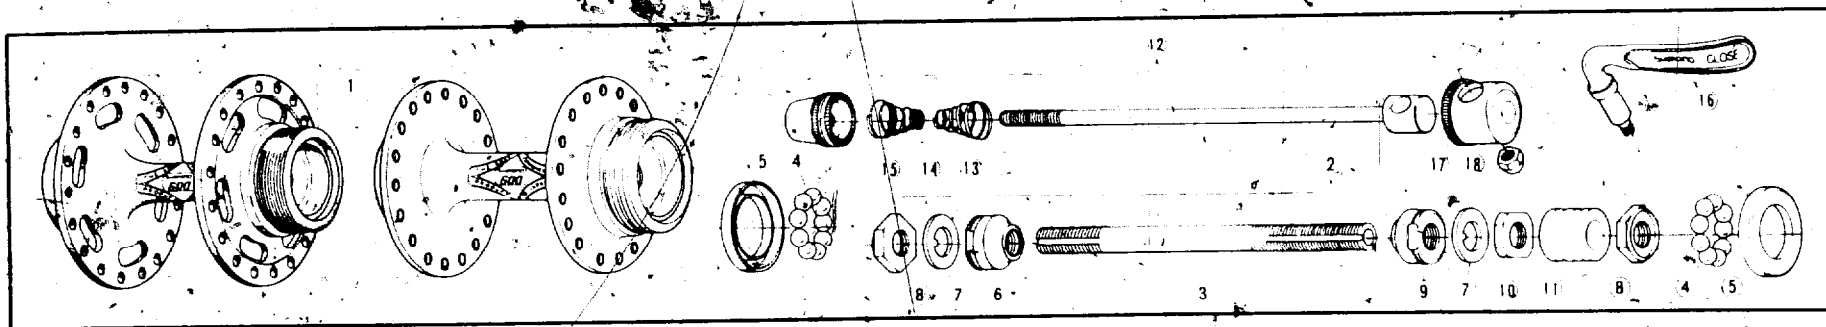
Shimano 600 rear hub for freewheel with quick release. Parts are: (1) hub shell—large and small flange models shown, (2) complete axle set, (3) axle, (4) steel ball, (5) dust cap, (6) cone, (7) key washer, (8) lock nut, (9) cone, (10) lock nut, (11) spacer, (12) complete quick release unit, (13) skewer, (14) volute spring, (15) nut for skewer, (16) cam lever, (17) body cam lever and (18) cap nut.
